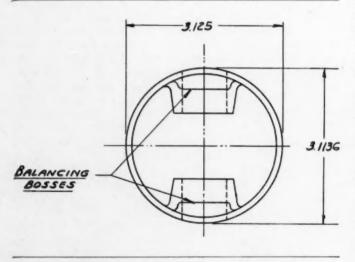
Open End of Piston Showing Elliptical Shape and Balancing Bosses
